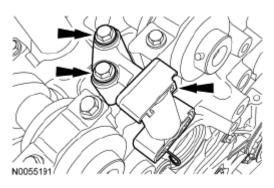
Locating RH Primary Timing Chain Guide Bolts Courtesy of FORD MOTOR CO.
